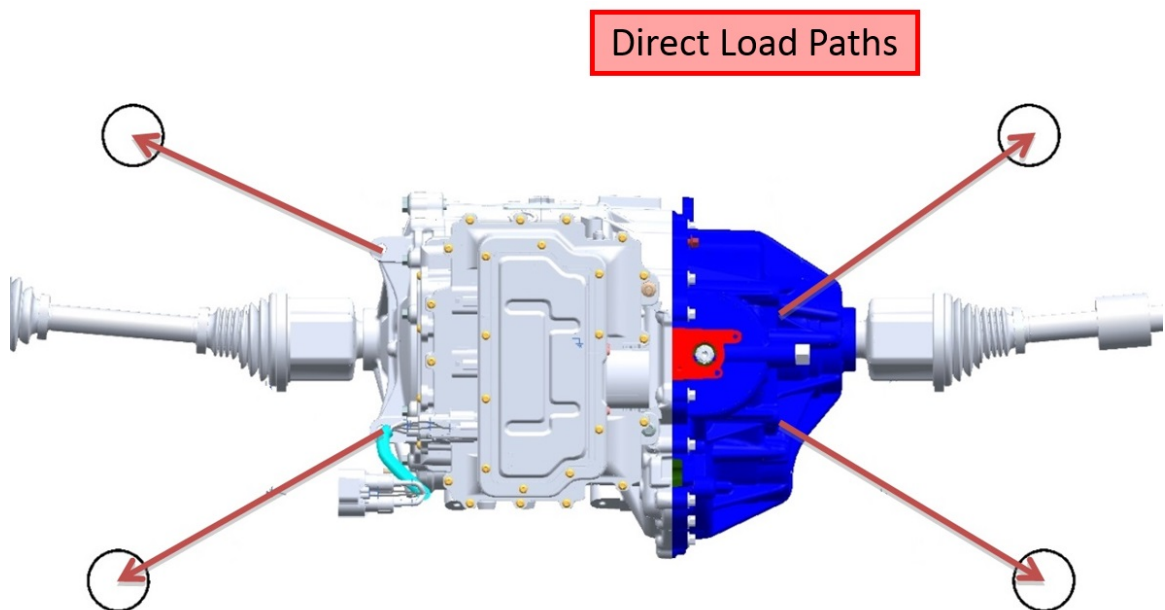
Theoretical direct force paths from motor mounts to chassis mounts.
